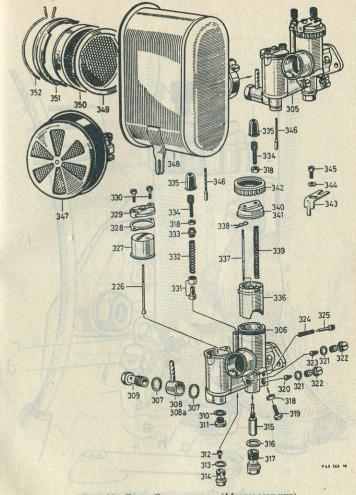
BING CARBURETTOR (MESSERSCHMITT)
